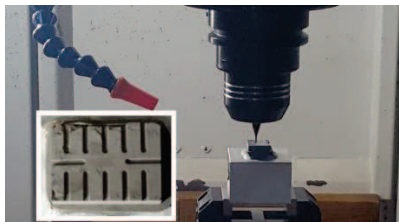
GF Mikron HPM 450U CNC machining centre and, in inset, 3D printed workpiece after slot milling operations
